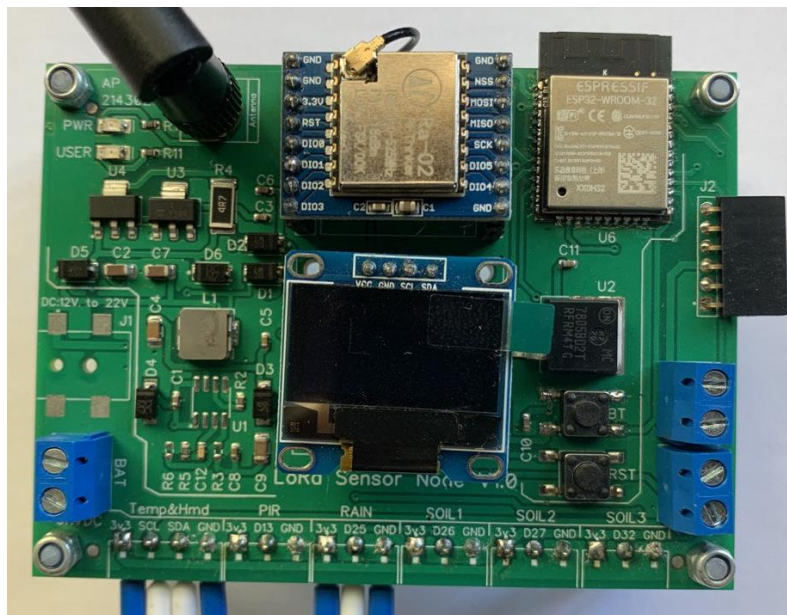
Completed LoRa Sensor node PCB with all surface mount and through hole components assembled.
